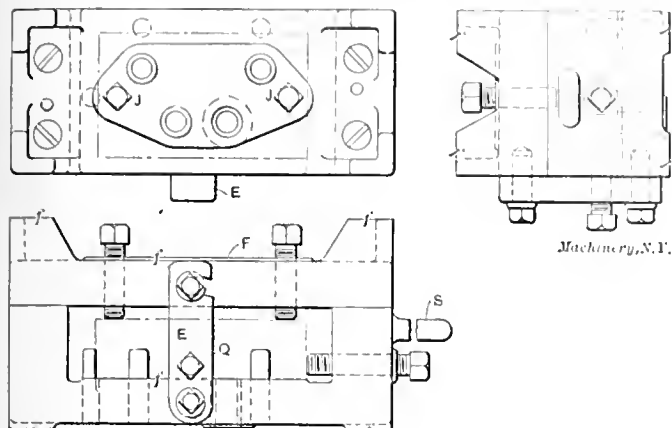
Jig Improved by adding Feet Opposite Faces containing Drill Bushings.
